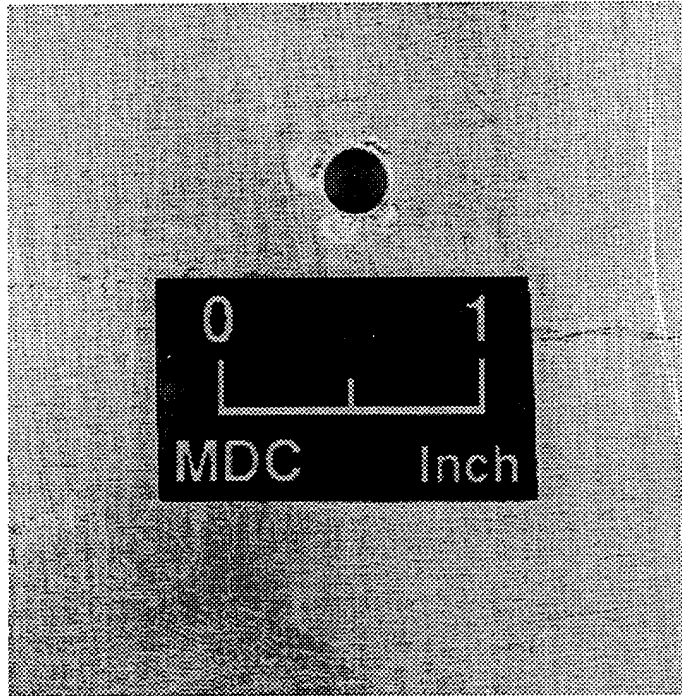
Photograph of Corrosion Around Countersunk Fastener Hole in Flush Head Fastener Hole Simple Structure.
